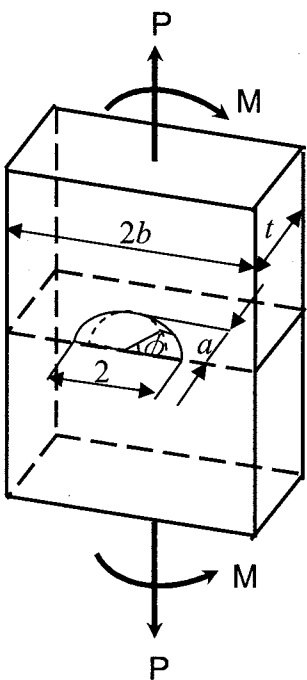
Crack model of plate with a finite surface crack for welding region
